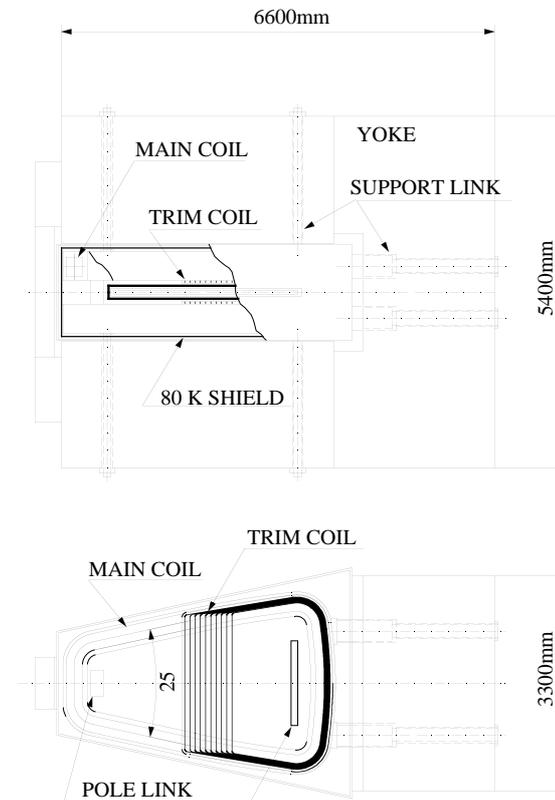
A schematic drawing of the model sector magnet: a side view(upper); a top view(lower).
